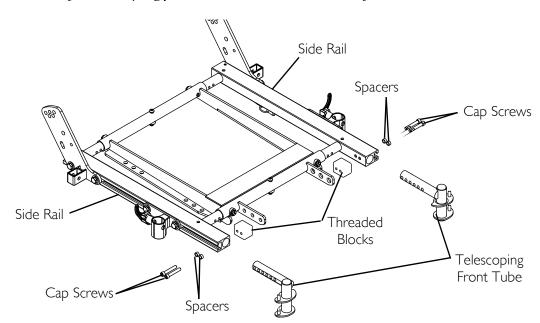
Adjusting/Replacing Telescoping Front Rigging Support
